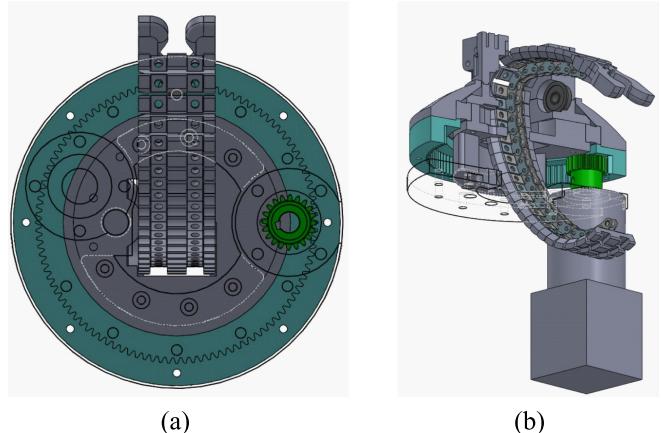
Design of the turret mechanism for azimuthal angle motion: (a) top view; (b) isometric view of the turret mechanism including the open chain actuator.
